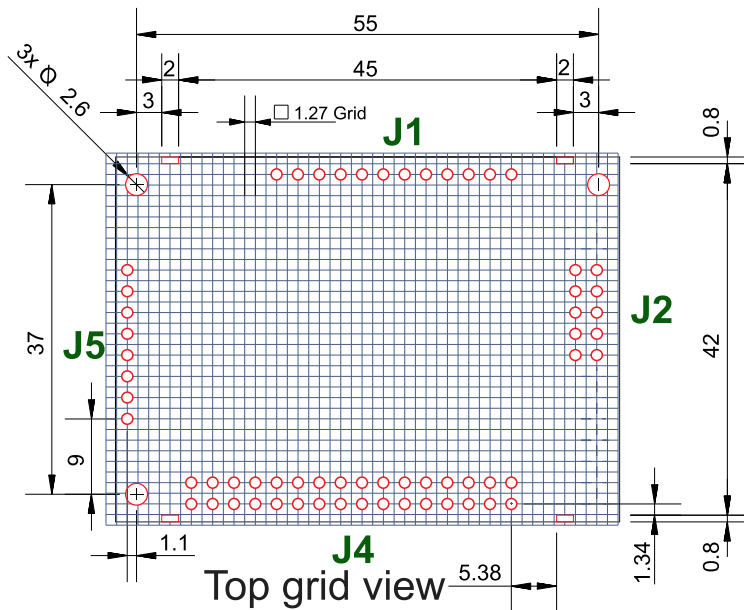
iPOS4808 MY-CAN PCB Footprint
